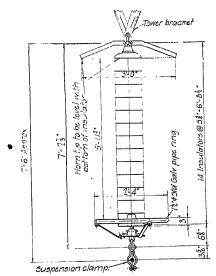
Wallenpaupack-Siegfried 220-Kv. Line Single string insulator assembly
